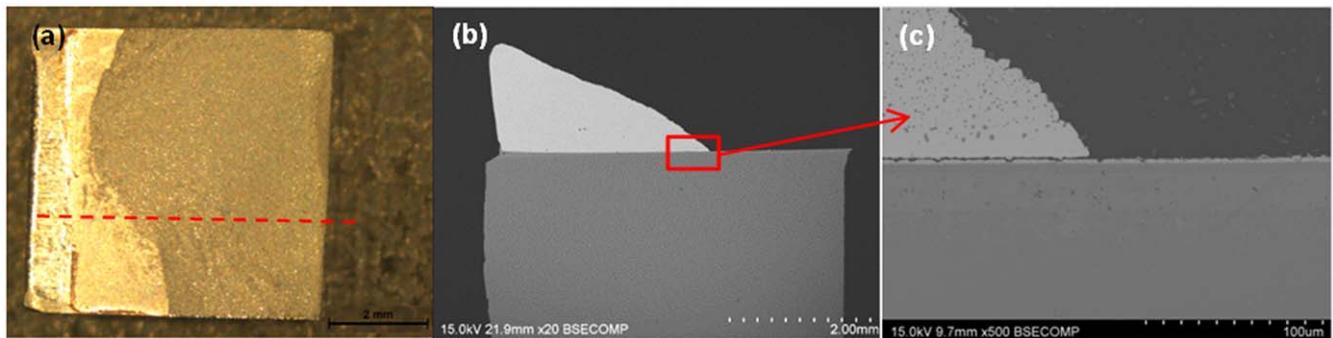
Fracture surfaces of W-TiC/Eurofer joints after the shear test: (a) stereoscopic image; (b) fracture cross section through the dash line in (a); (c) detail of the crack propagation in the two fracture zones.
